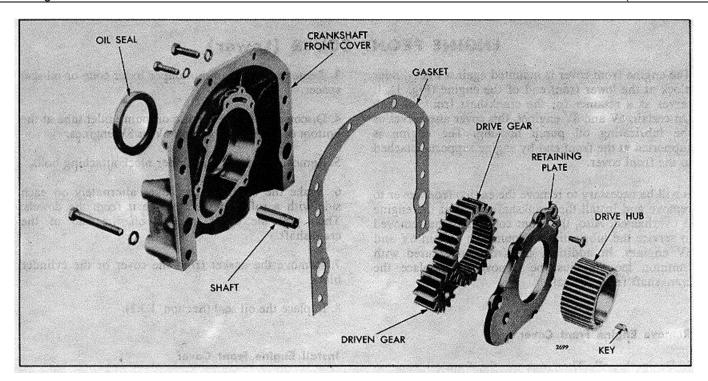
Front Cover Details and Relative Location of Parts (6V and 8V Engines)
